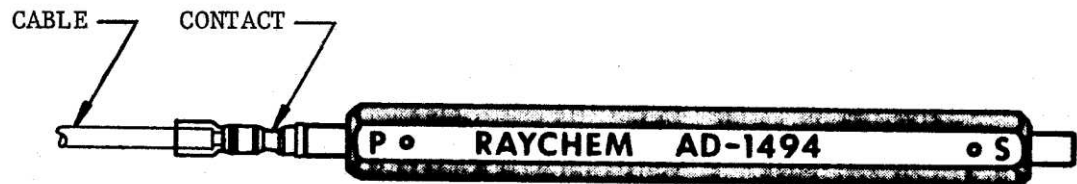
AD-1494 REPAIR HOLDING FIXTURES WITH CONTACT/CABLE ASSEMBLY
